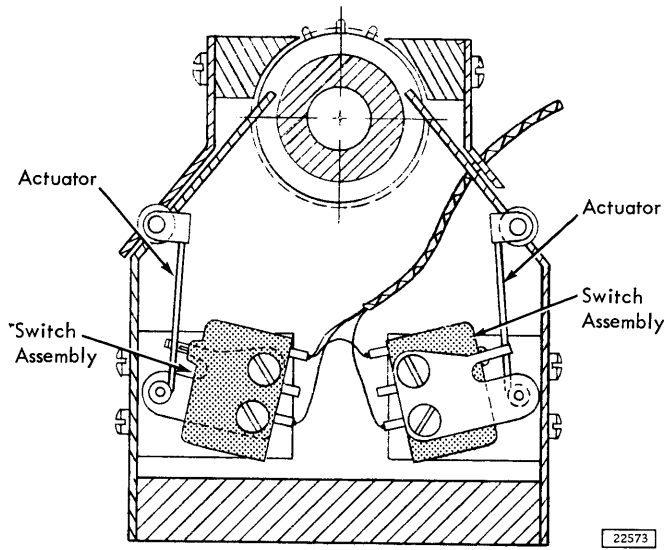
Outboard Bearing Block, with End of Tape Switch
